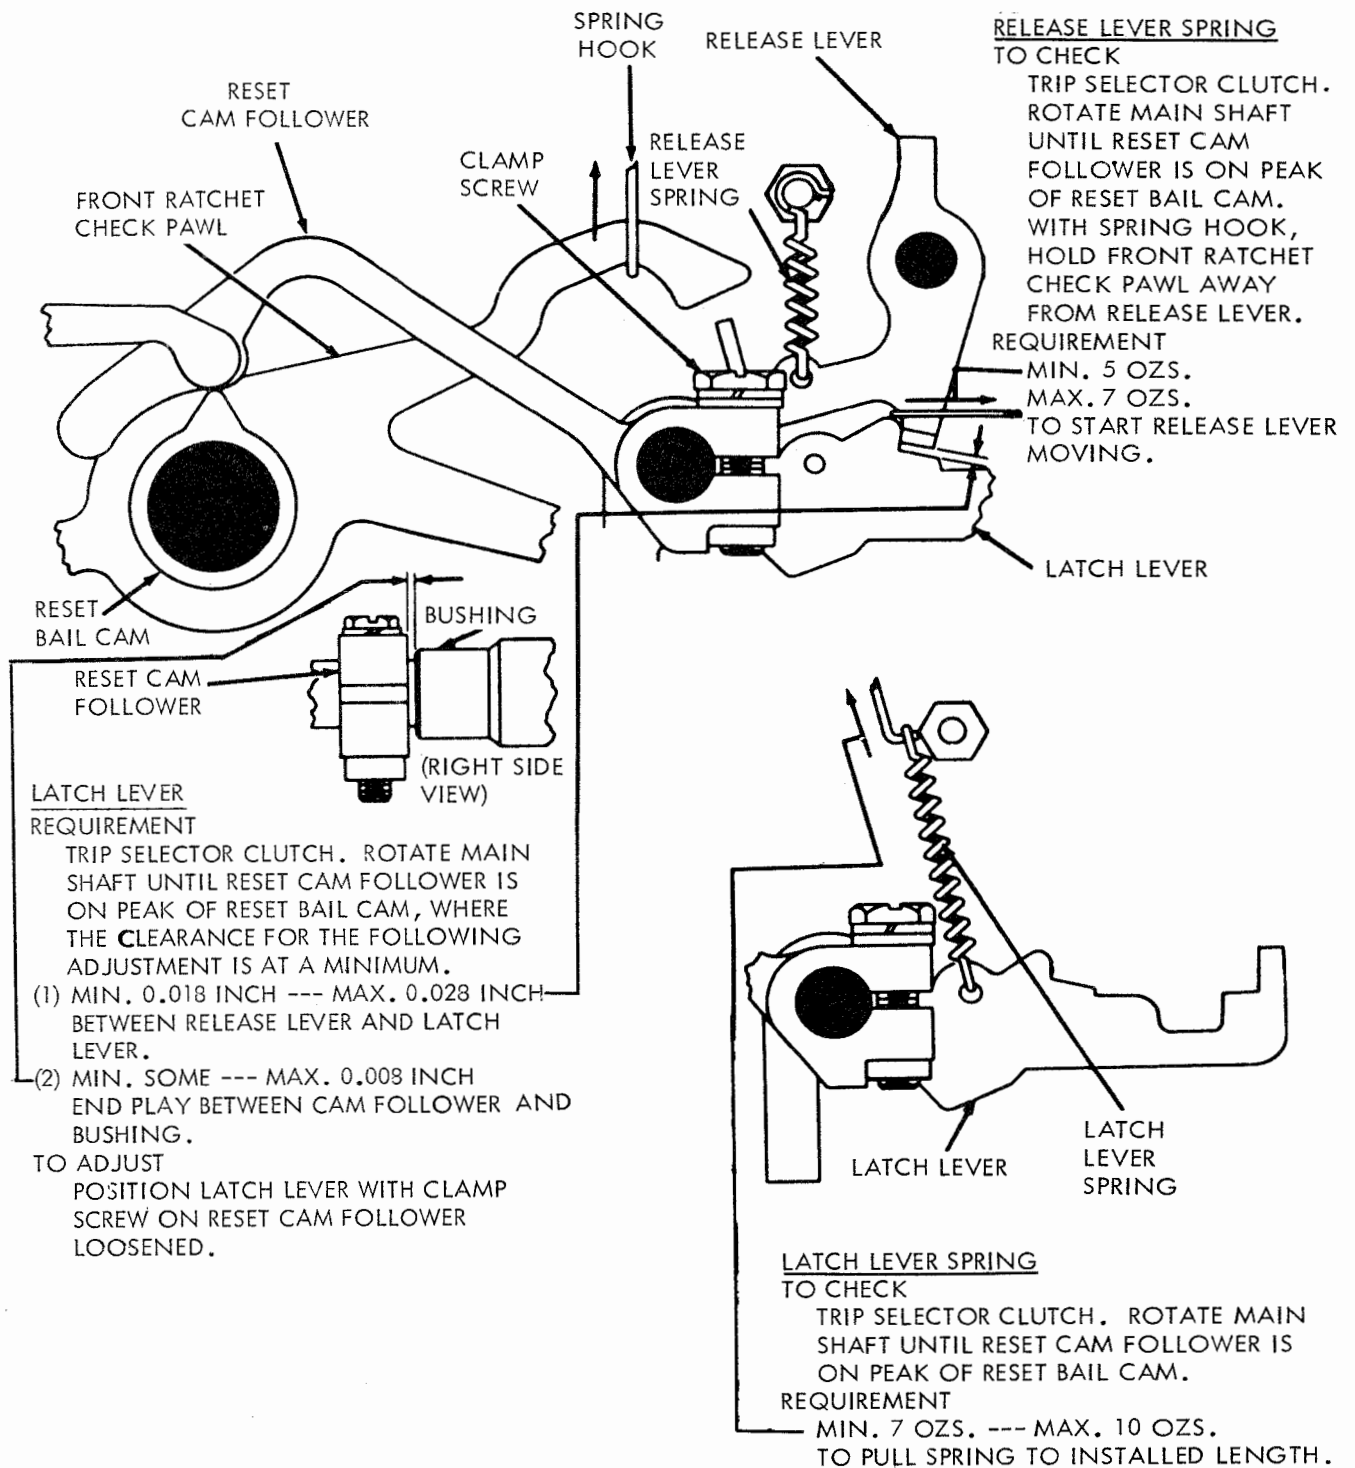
C. TYPING REPERFORATOR TT-375/UG, REMOTE CONTROL NON-INTERFERING BLANK TAPE FEED-OUT MECHANISM
